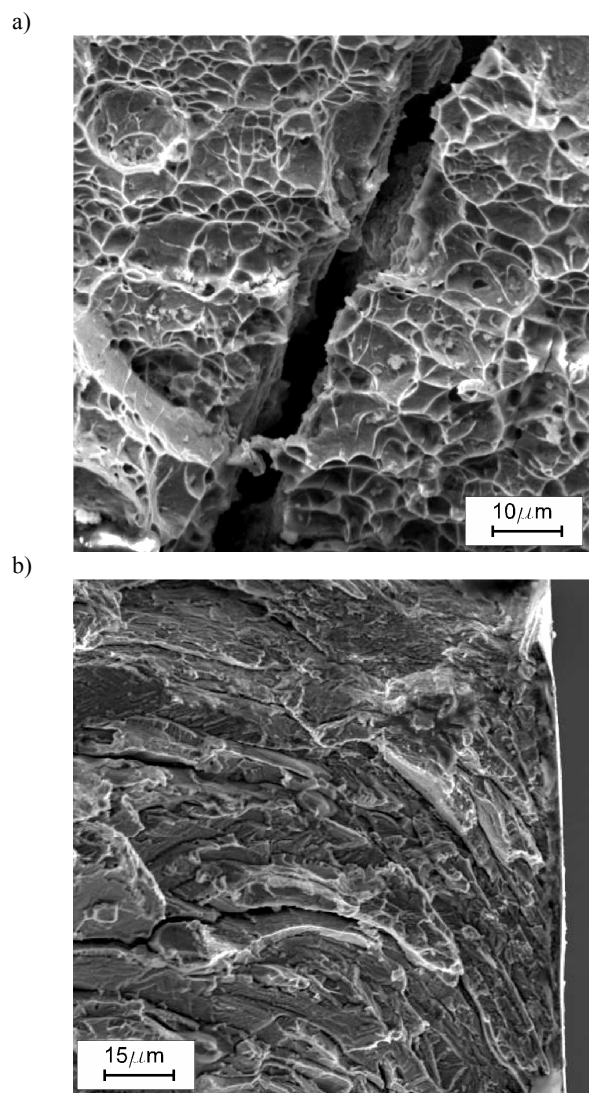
Fracture surfaces of a) S120, b) S160 samples after SSR test in boiling  $MgCl_2$  solution
